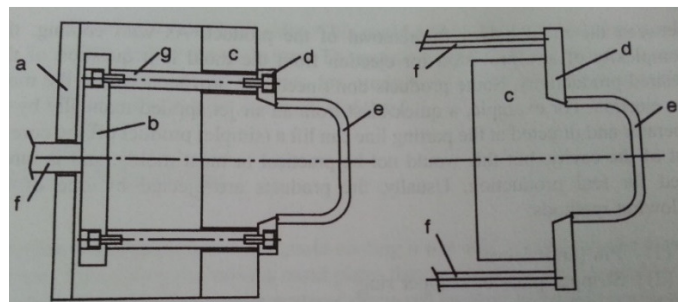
(Left) Section through stripper ring mould: (a) mounting plate, (b) ejector plate, (c) core plate, (d) stripper plate, (e) moulded product, (f) machine ejector, (g) connecting sleeve. (Right) Section through stripper plate mould: (a) mounting plate, (b) ejector plate, (c) core and mounting plate, (d) stripper plate, (e) moulded product, (f) machine ejector. (Herbert, *Understanding Product Design for Injection Molding*)
